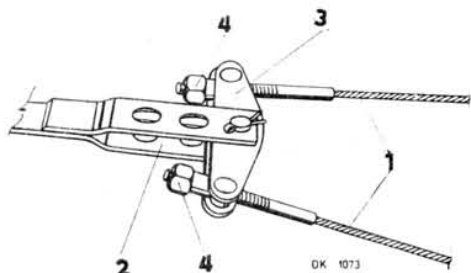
/1 - Rocker with Tie-rod and Brake Cables
